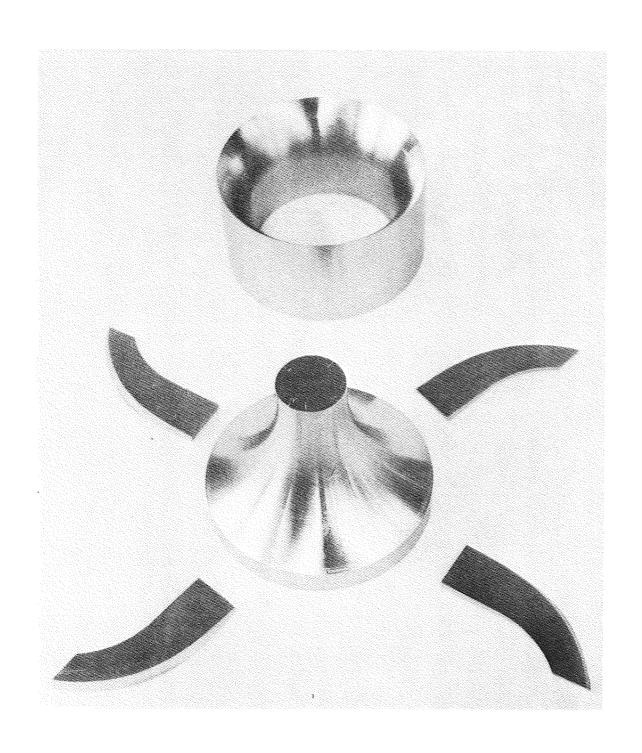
Final Simulated Impeller Sample Showing Vanes and Shrouds
